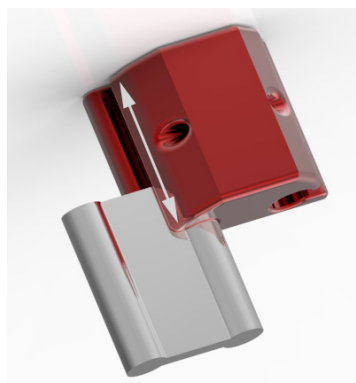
Depiction of how the rigid and flexible parts are assembled
